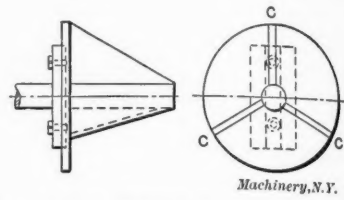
Winged Center held in the Turret and used to set the Blank on the Face-plate.
